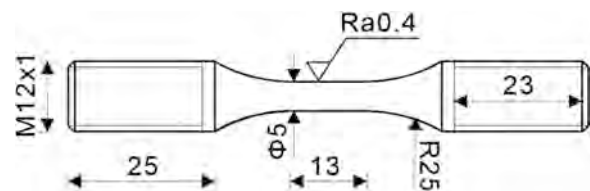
Shape and size of experimental specimens with dimensions in mm.
